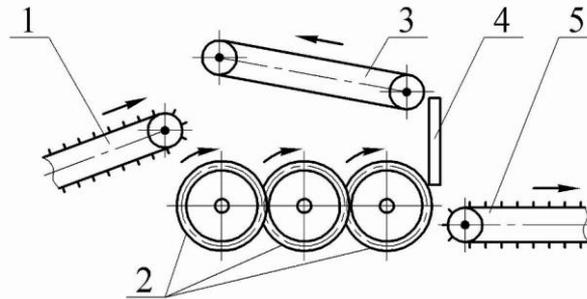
Potato heap separator of improved design (side view): 1 – feeding conveyor; 2 – cantilevered spiral springs of cleaning rolls; 3 – rebounding belt conveyor; 4 – protecting apron; 5 – discharge conveyor.
